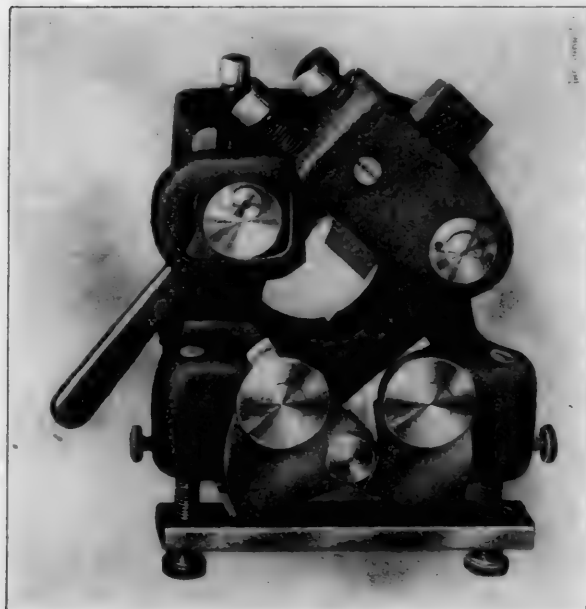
UNIVERSAL TURNER WITH ROLLER BACK REST.
